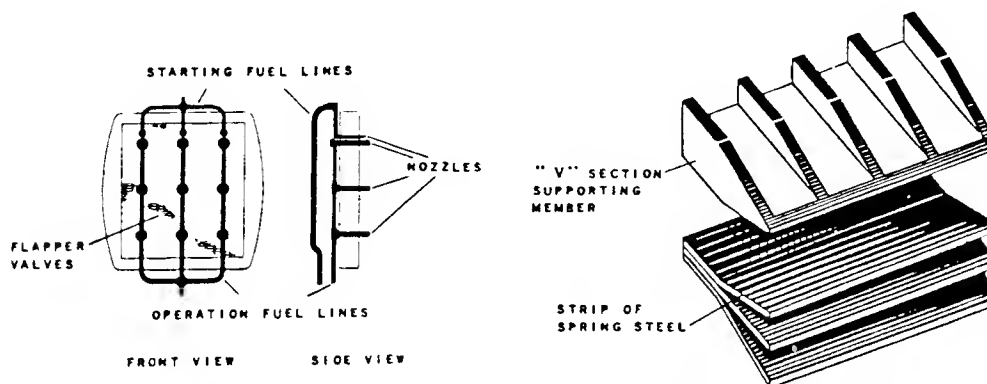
Air intake flapper valve arrangement, pulse jet engines.
